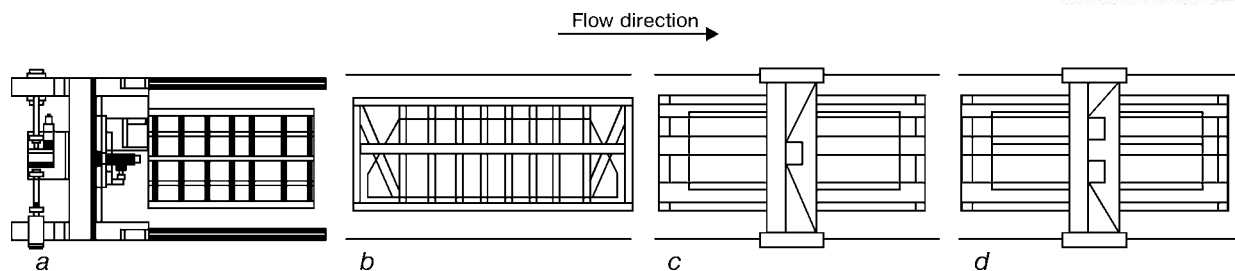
Schematic of a flow line for assembly and welding of the side wall of a car for mineral transportation: *a* — set up for sheathing panel assembly and welding; *b* — bench for assembly of the side wall with the panel; *c* — machine for ASW of the panel to the frame; *d* — machine for automatic welding of the panel to the ties
